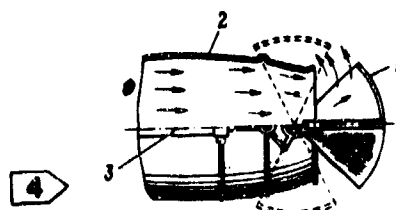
Two-flap reversing device: 1 -- flaps; 2 -- engine exhaust nozzle; 3 -- hydraulic cylinder.
